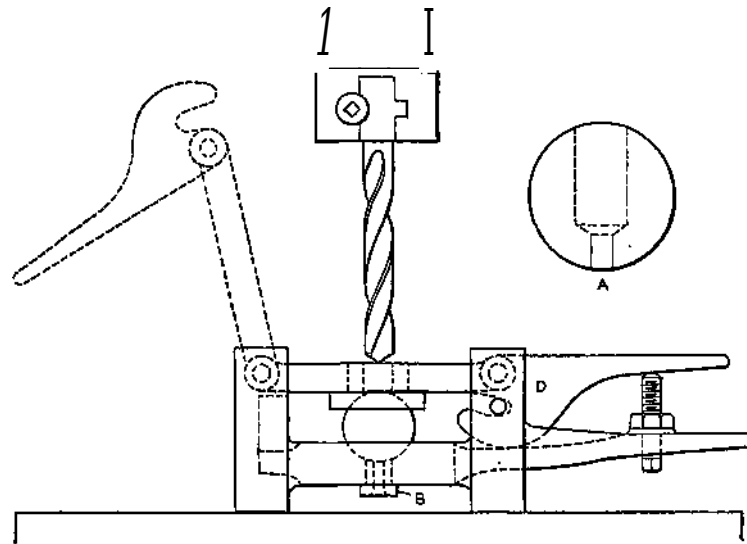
Box Jig for Drilling Ball shown enlarged at A
